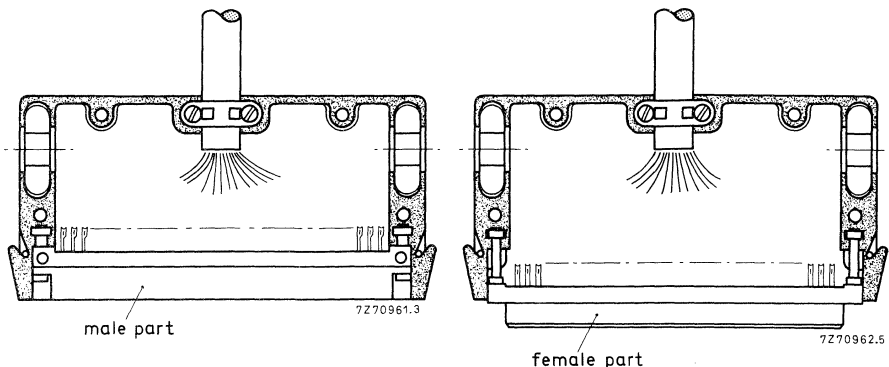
Fixing of cable to the hood and mounting of the hood to the connector part. Maximum permissible cable diameter is 11 mm (e.g. 96 insulated wires AWG30).
